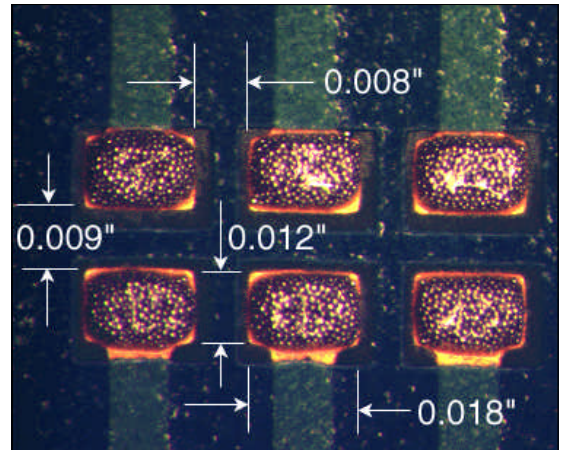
Printed Solder Paste on Attachment Pad CEG
